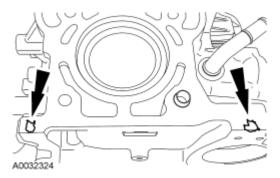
Identifying Silicone Gasket And Sealant Location Courtesy of FORD MOTOR CO.
